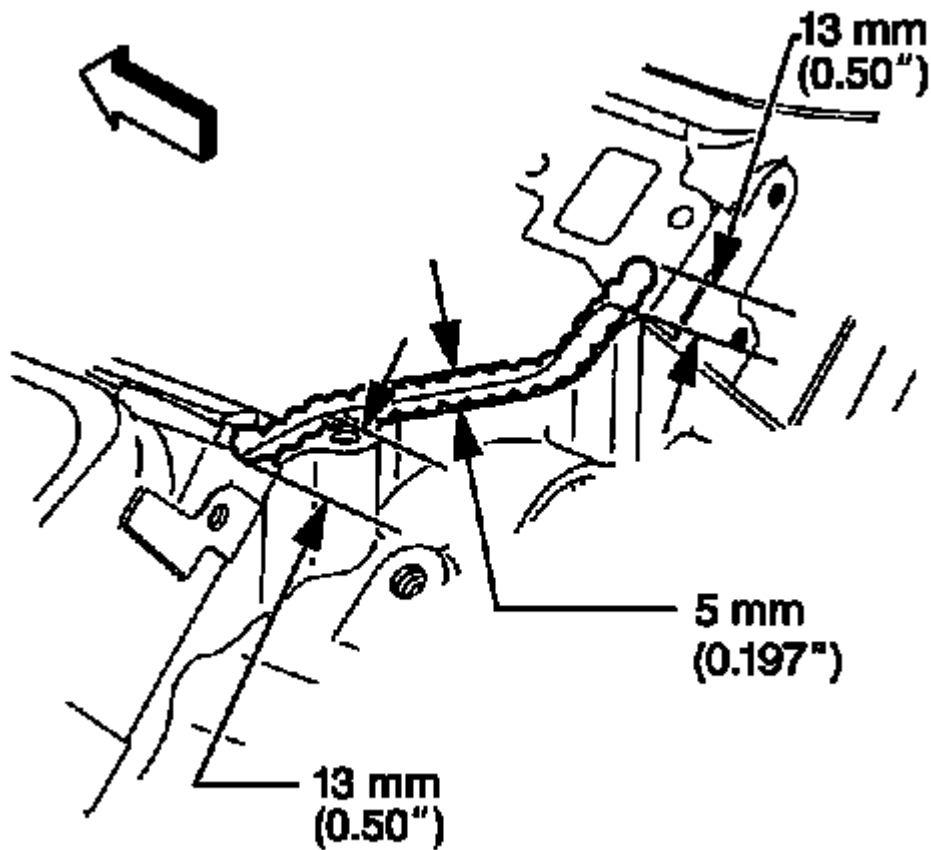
Applying Adhesive To Rear Top Of Engine Block
